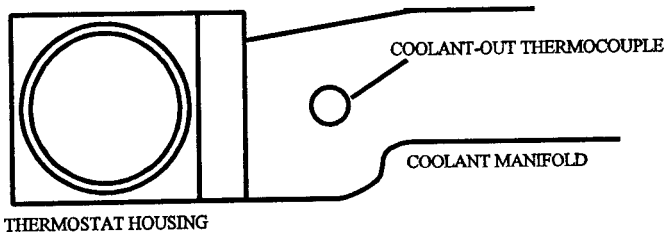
Coolant-out Thermocouple Location (Top View)
